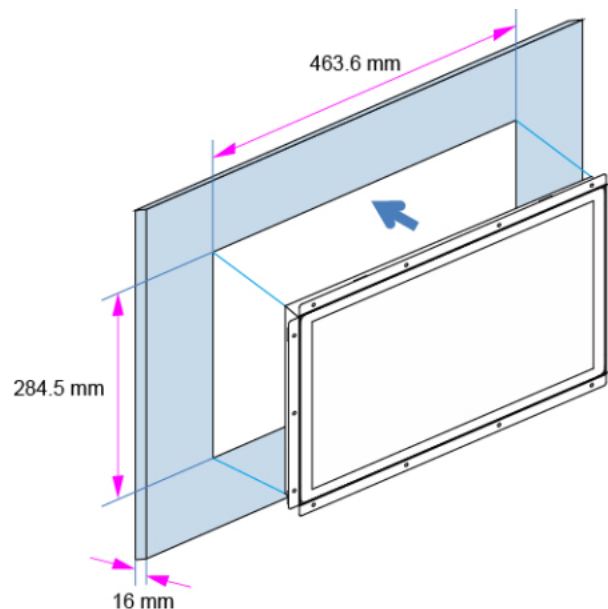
OPC-1852 Panel Mount Cut-out hole and maximum panel thickness
